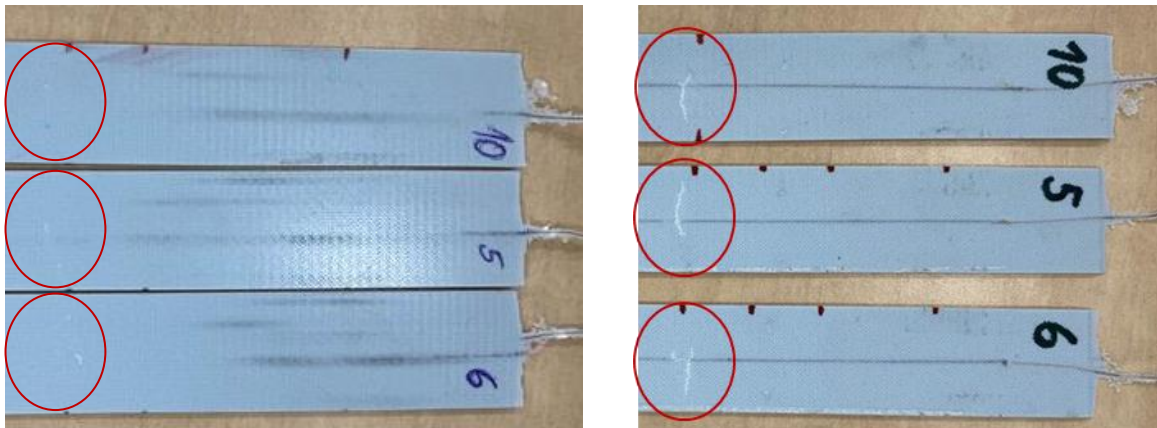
Specimen CF sensor -140-5, CF sensor-140-6, CF sensor -140-10 after 3J impact, impacted side (mold side of the specimen) on the left, bottom side of the specimen on the right side. The red circle indicates the impacted area.
